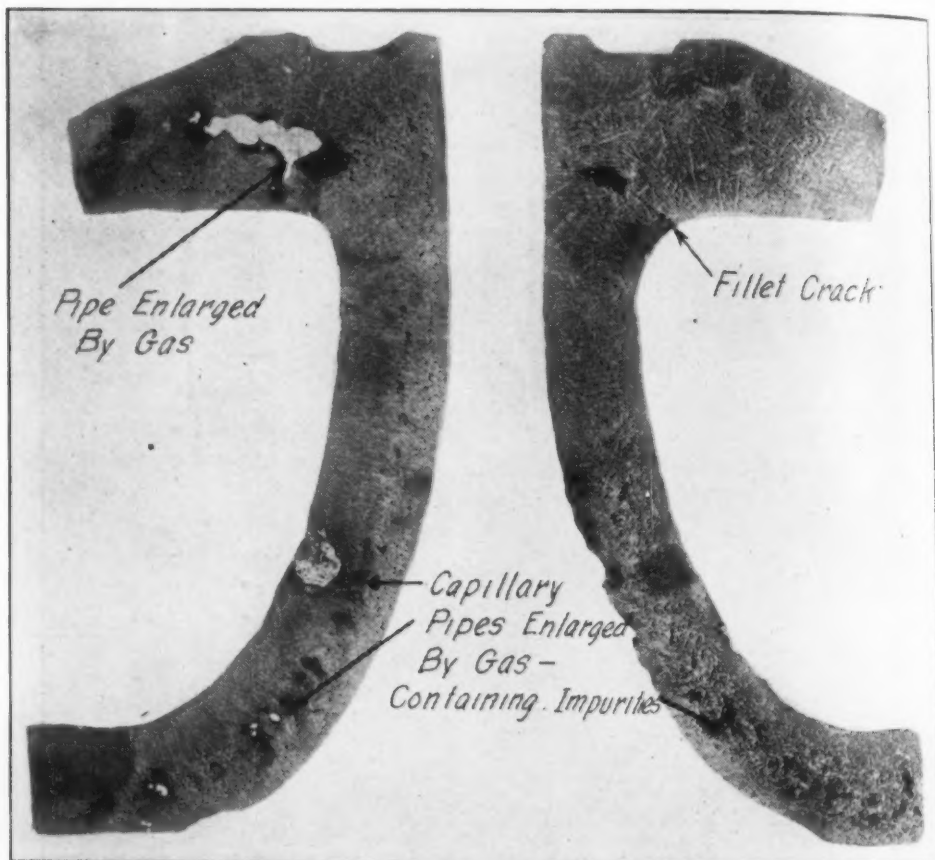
Photograph of Deeply-Etched Cross Section of Steel Casting Showing Pipes and Cracks.
